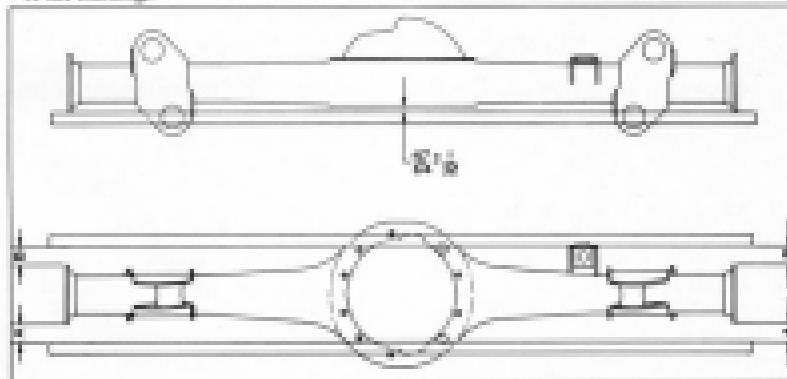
Checking Horizontal and Vertical Alignment of Axle Housing.
